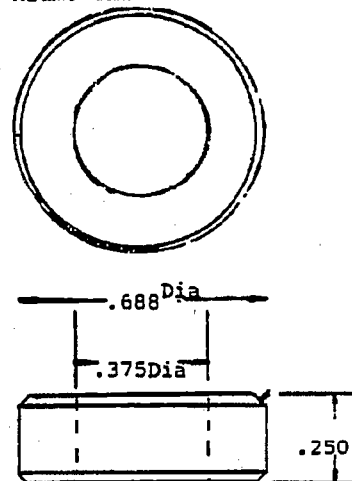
Top shield for the electron gun is bolted to the top mounting bracket with three 2-56 screws (see Fig. A.35).
